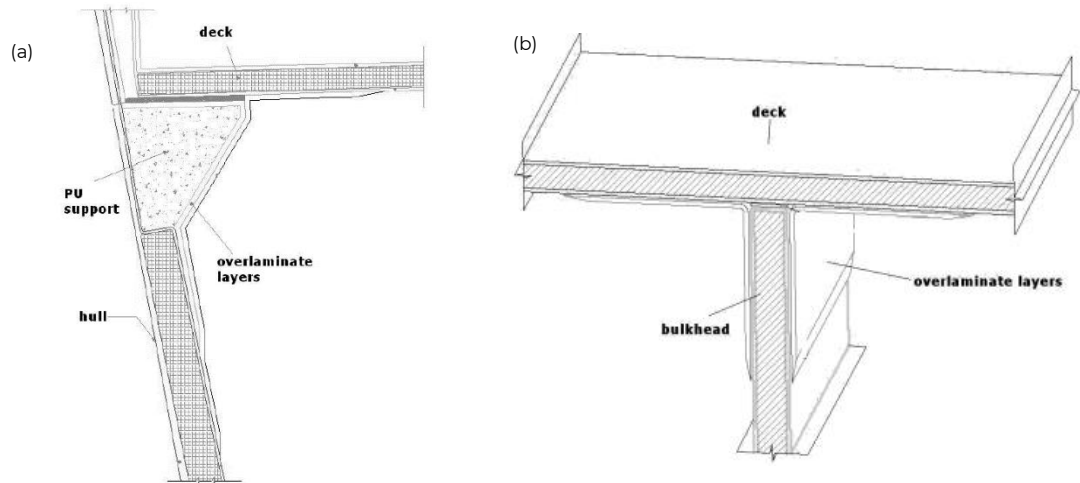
Examples of overlaminated joints. (a) Deck-side shell connection (b) T-joint connecting deck and bulkhead
